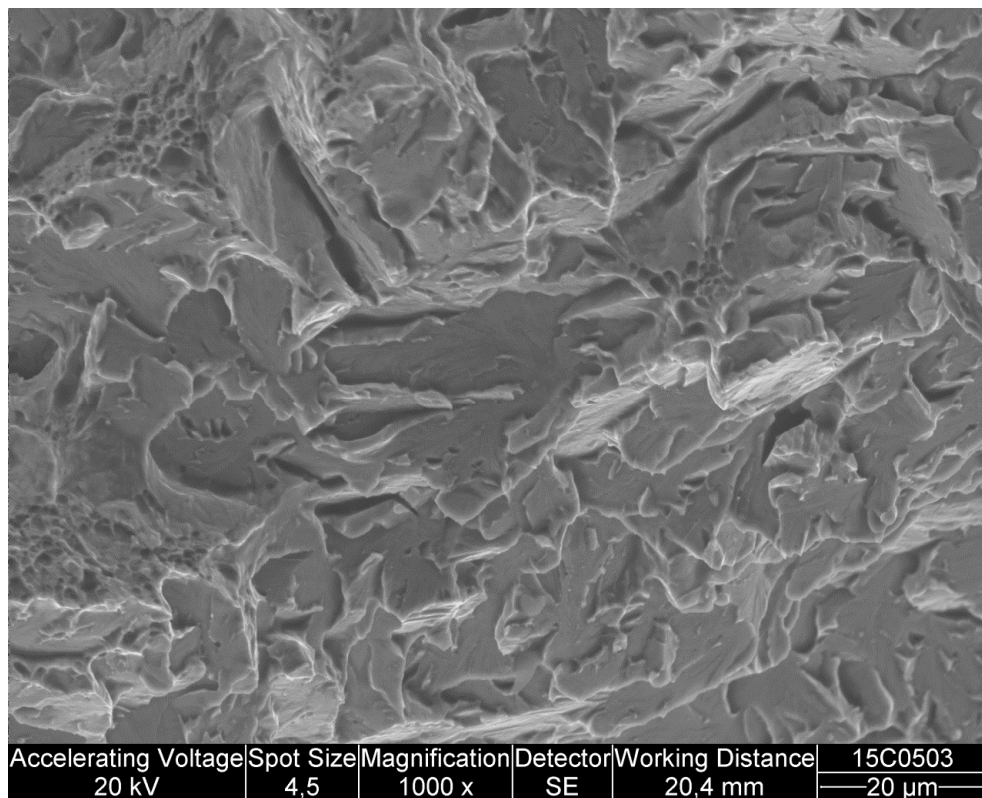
SEM image from the fracture surface of a longitudinal crack initiated from the corner of a machined steep notch on the inner surface of the specimen (specimen no 2.3).
